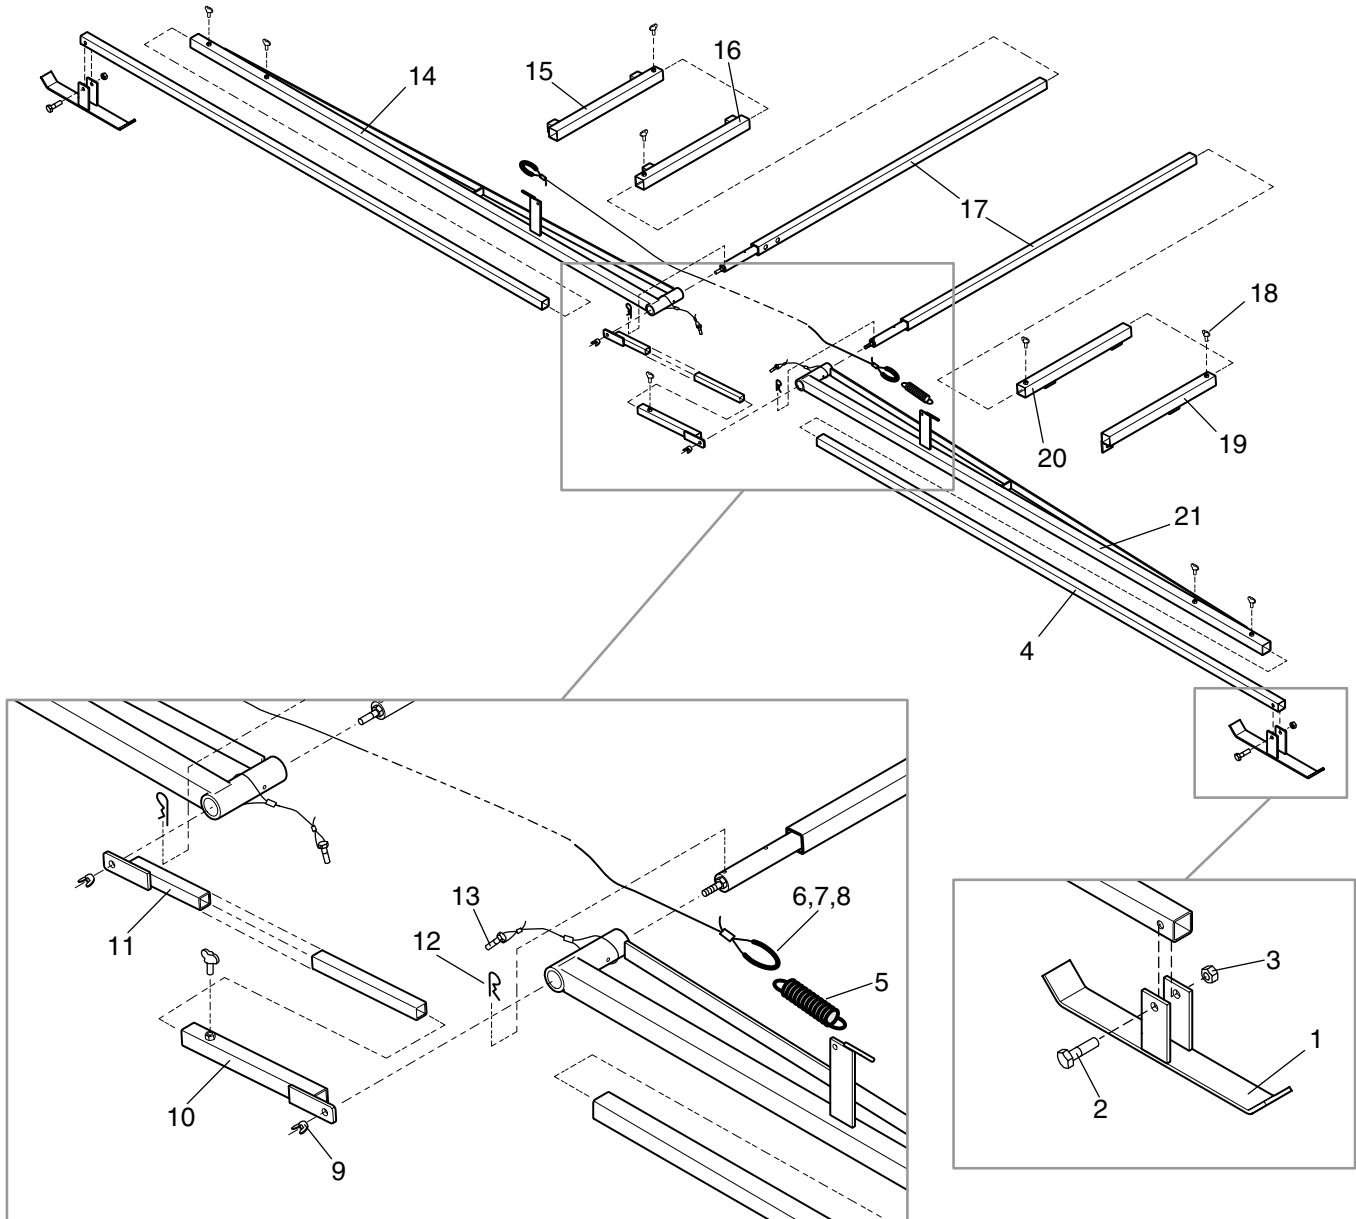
Option - 30' -40'Paver Leveling Ski Assembly
